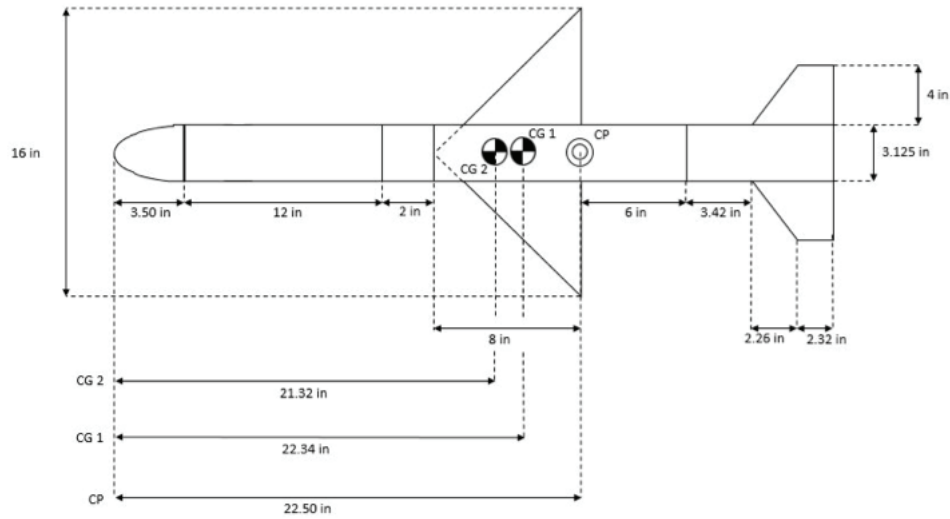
Dimensioned drawing of our Pegasus XL rocket
